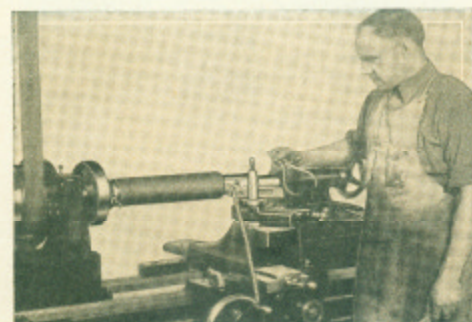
The General Purpose Lathe Will Machine All Metals Such as Steel, Cast Iron, etc.
